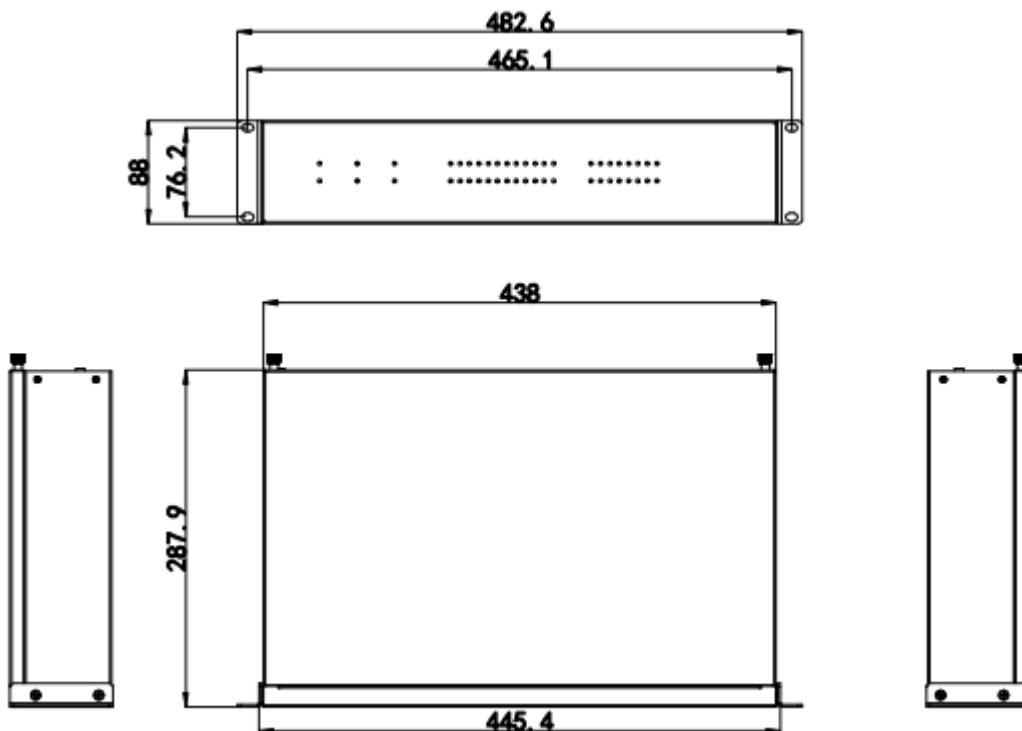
Dimensions of this relay (2U 19" rack) and the cut-out in the cubicle (unit: mm)
